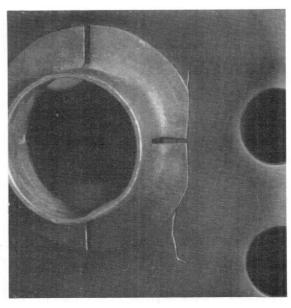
Example of a single crack under the flange of an early-type interconnector sleeve; not repairable.
